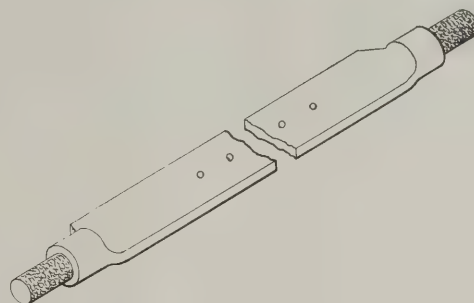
Building Up Brake Shaft Ends; Electric Welding Preferred
